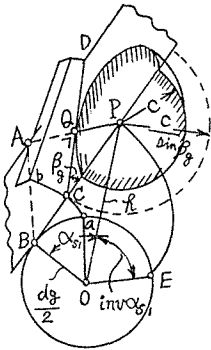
Contact of the involute worm thread screw surface and the sphere
